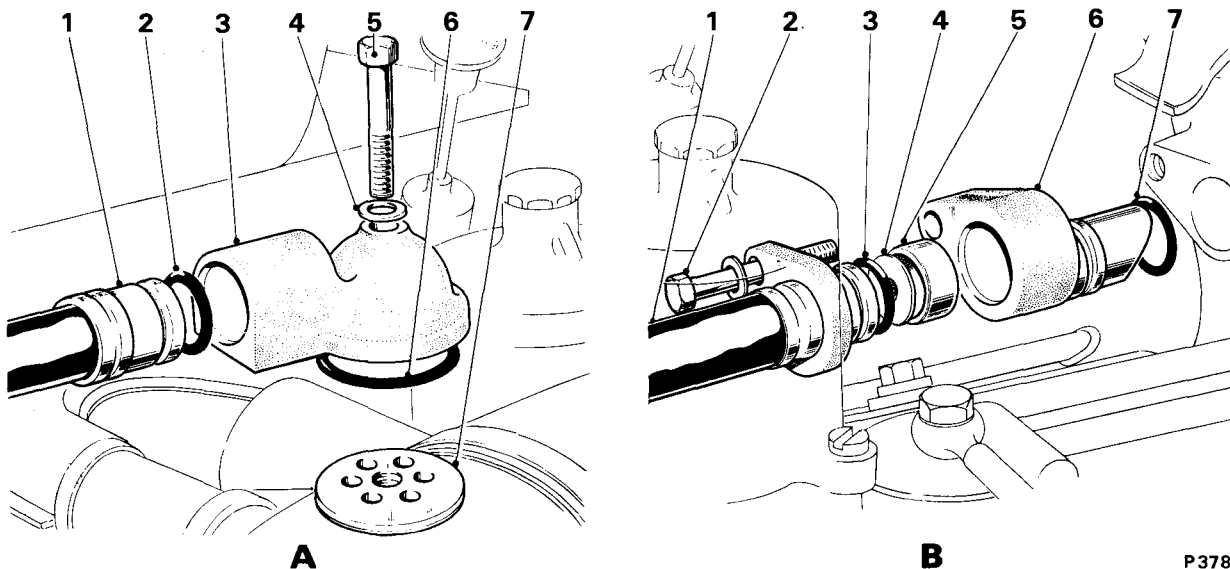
EXPLODED VIEW OF CRANKCASE EMISSION CONTROL PIPE
